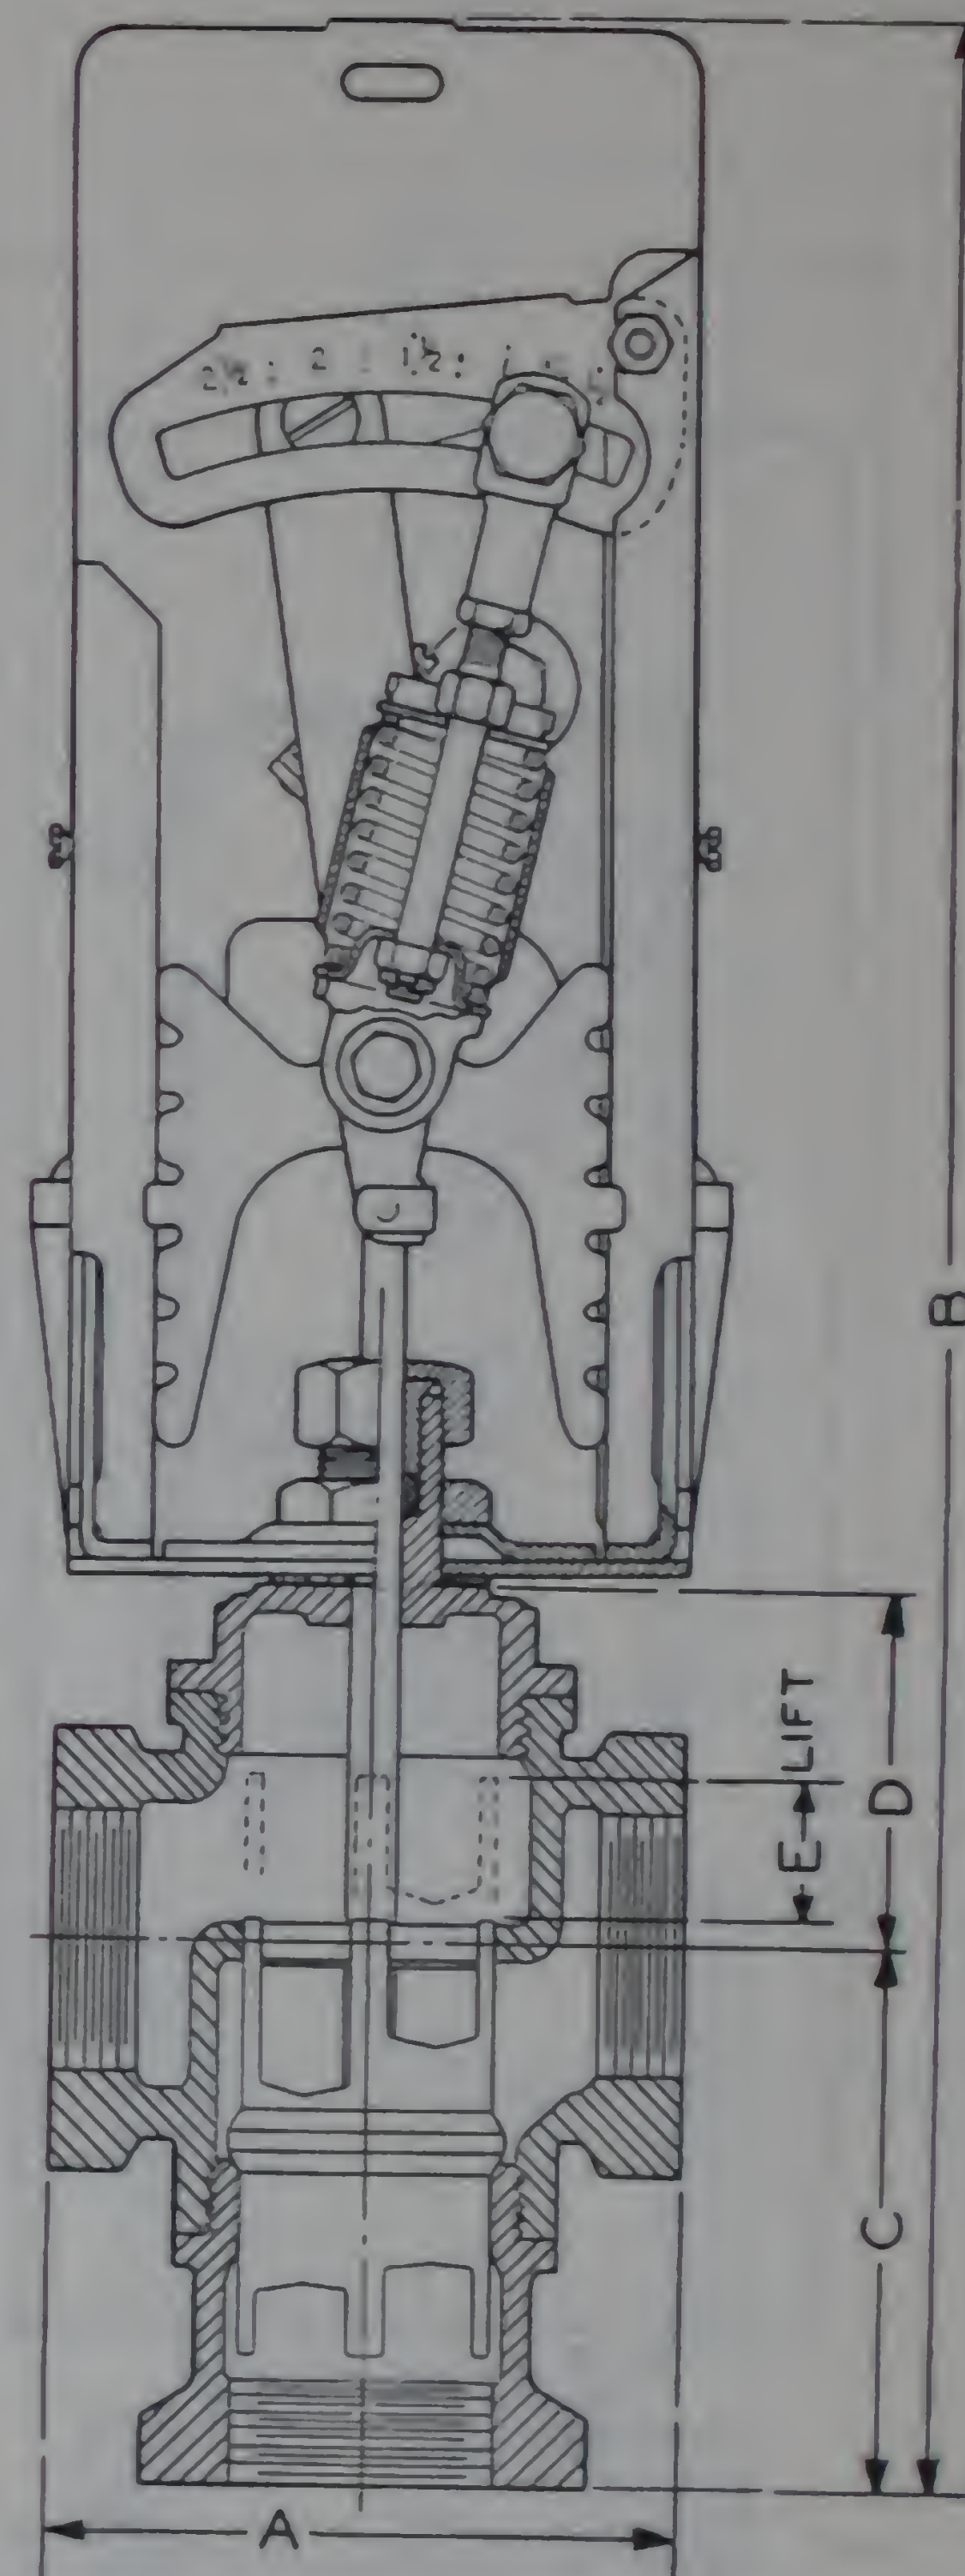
Dimensional drawing of screwed type K903A Motorized Valve
